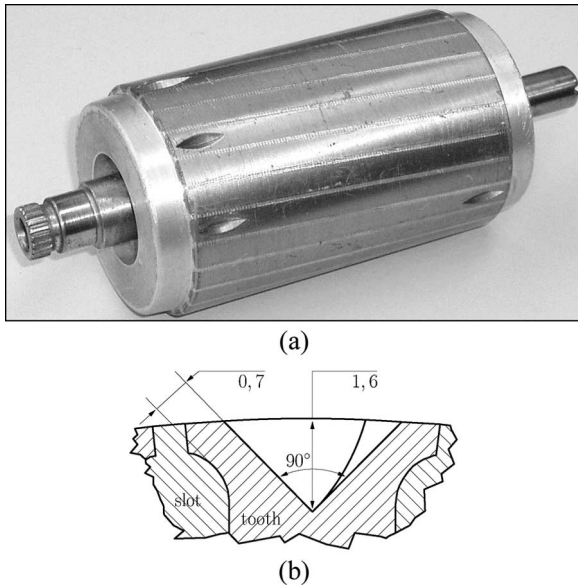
Balancing kerfs in the rotor teeth. (a) Balancing kerfs in the rotor teeth. (b) Cross section of rotor tooth with balancing kerf.
